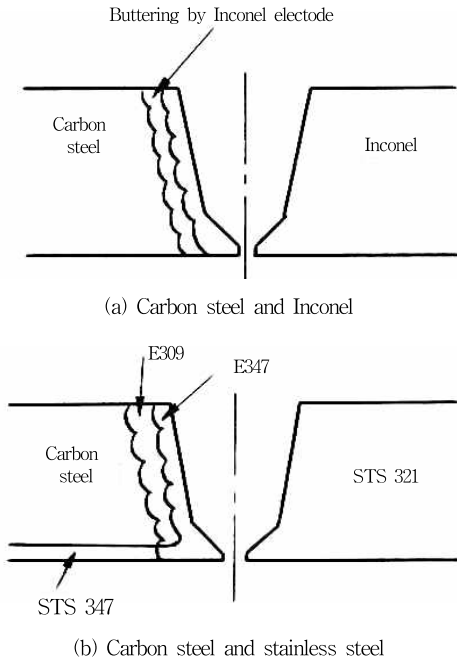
Schematic drawings of butt welding methods for dissimilar metals
